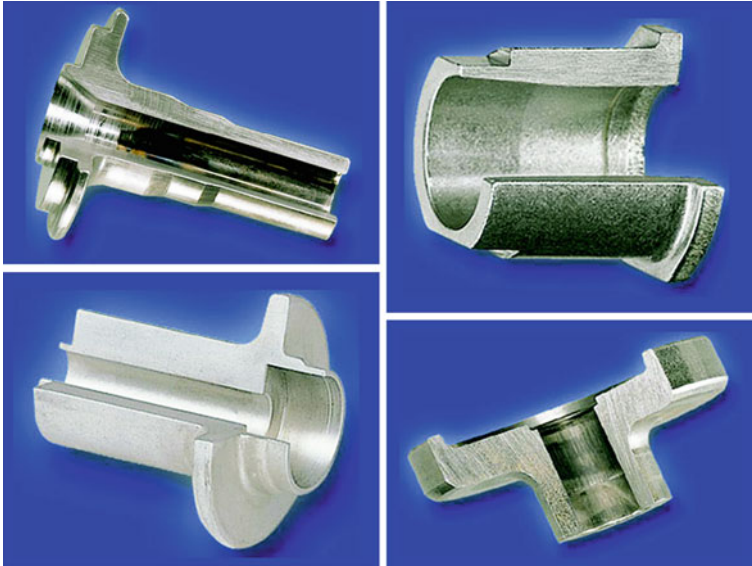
Manufacturing examples of flanges (Source A.&E Keller GmbH)
